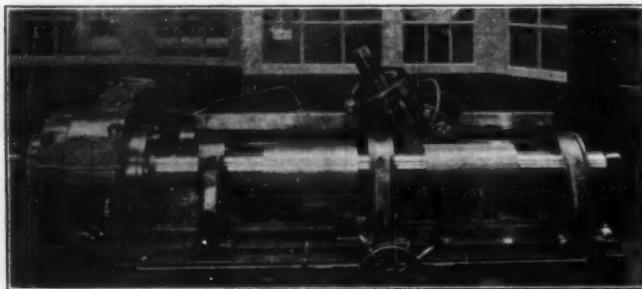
GEAR-CUTTING MACHINE FOR PINIONS, WITH BOOTH FOR MAINTAINING EVEN TEMPERATURE SHOWN IN THE BACKGROUND
